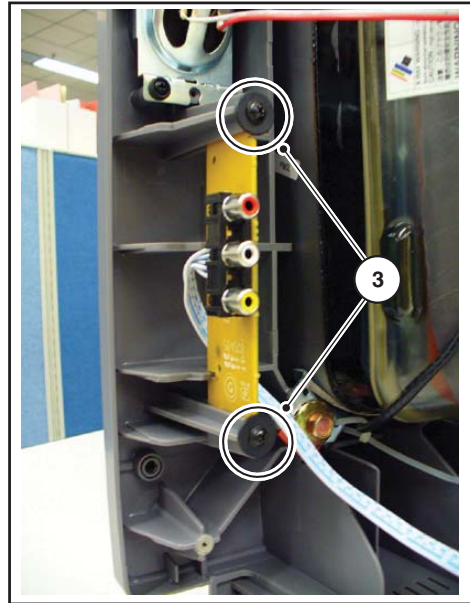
Side-IO/Keyboard panel removal (SYRF styling)
